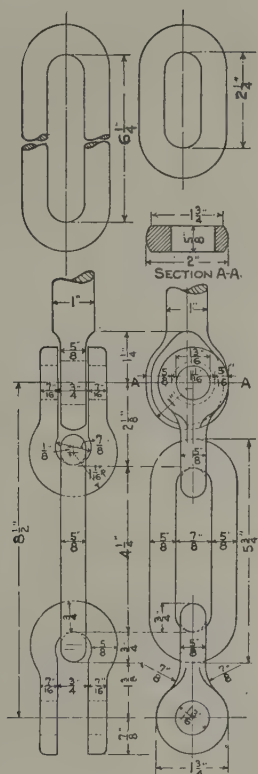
M. C. B. Standard Uncoupling Attachments.
